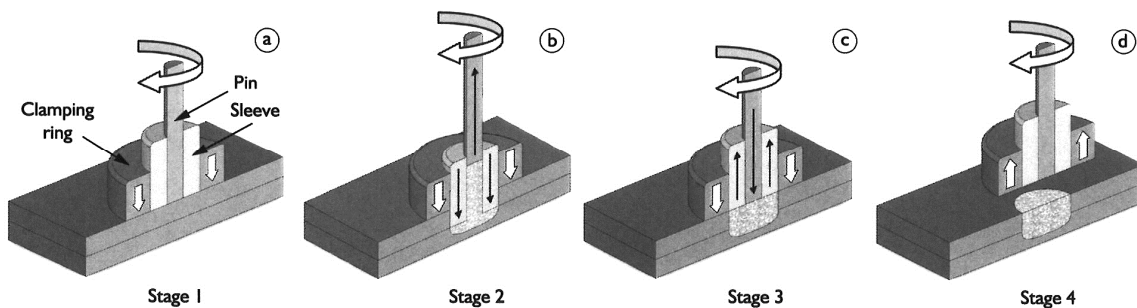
Working principle of friction spot welding ^{[11],[12]}
